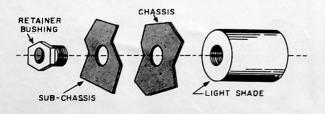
ASSEMBLY DETAILS OF THE SUB-CHASSIS MOUNTING
